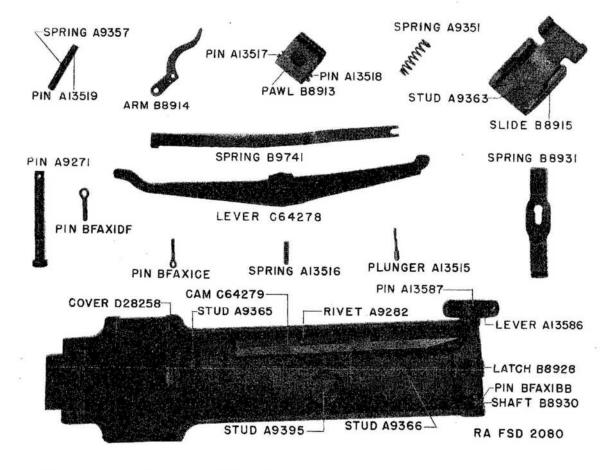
BROWNING MACHINE GUN, CAL. .50, M2, AIRCRAFT - COVER GROUP - PARTS
